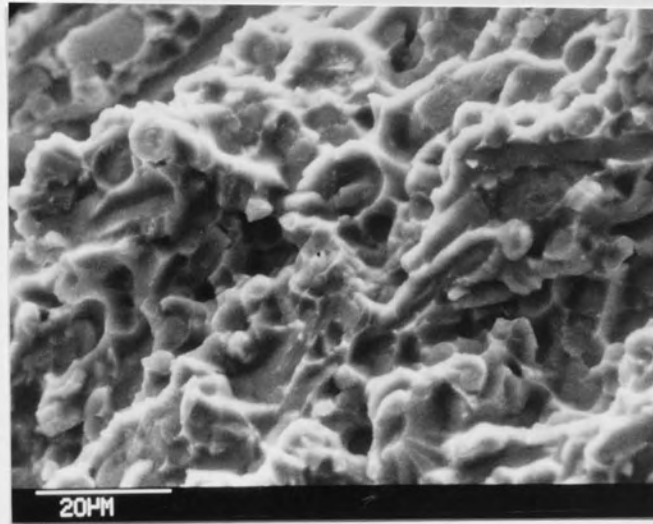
Large non-metallic inclusion found on Saffil/6061-T6 fatigue fracture surfaces.
